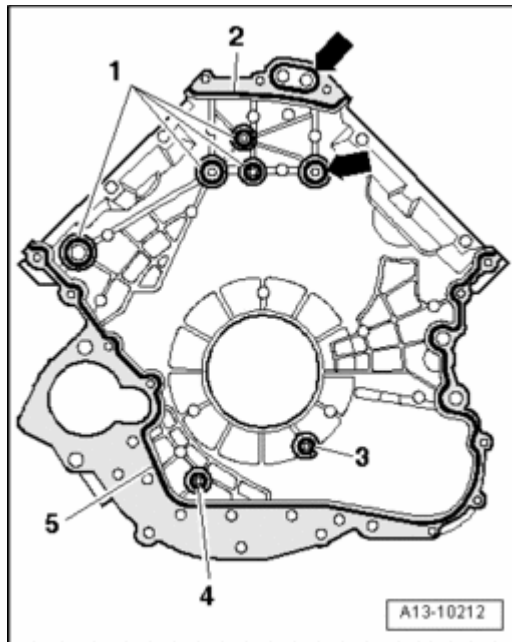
Applying sealant beads on clean sealing surfaces of lower timing chain cover
